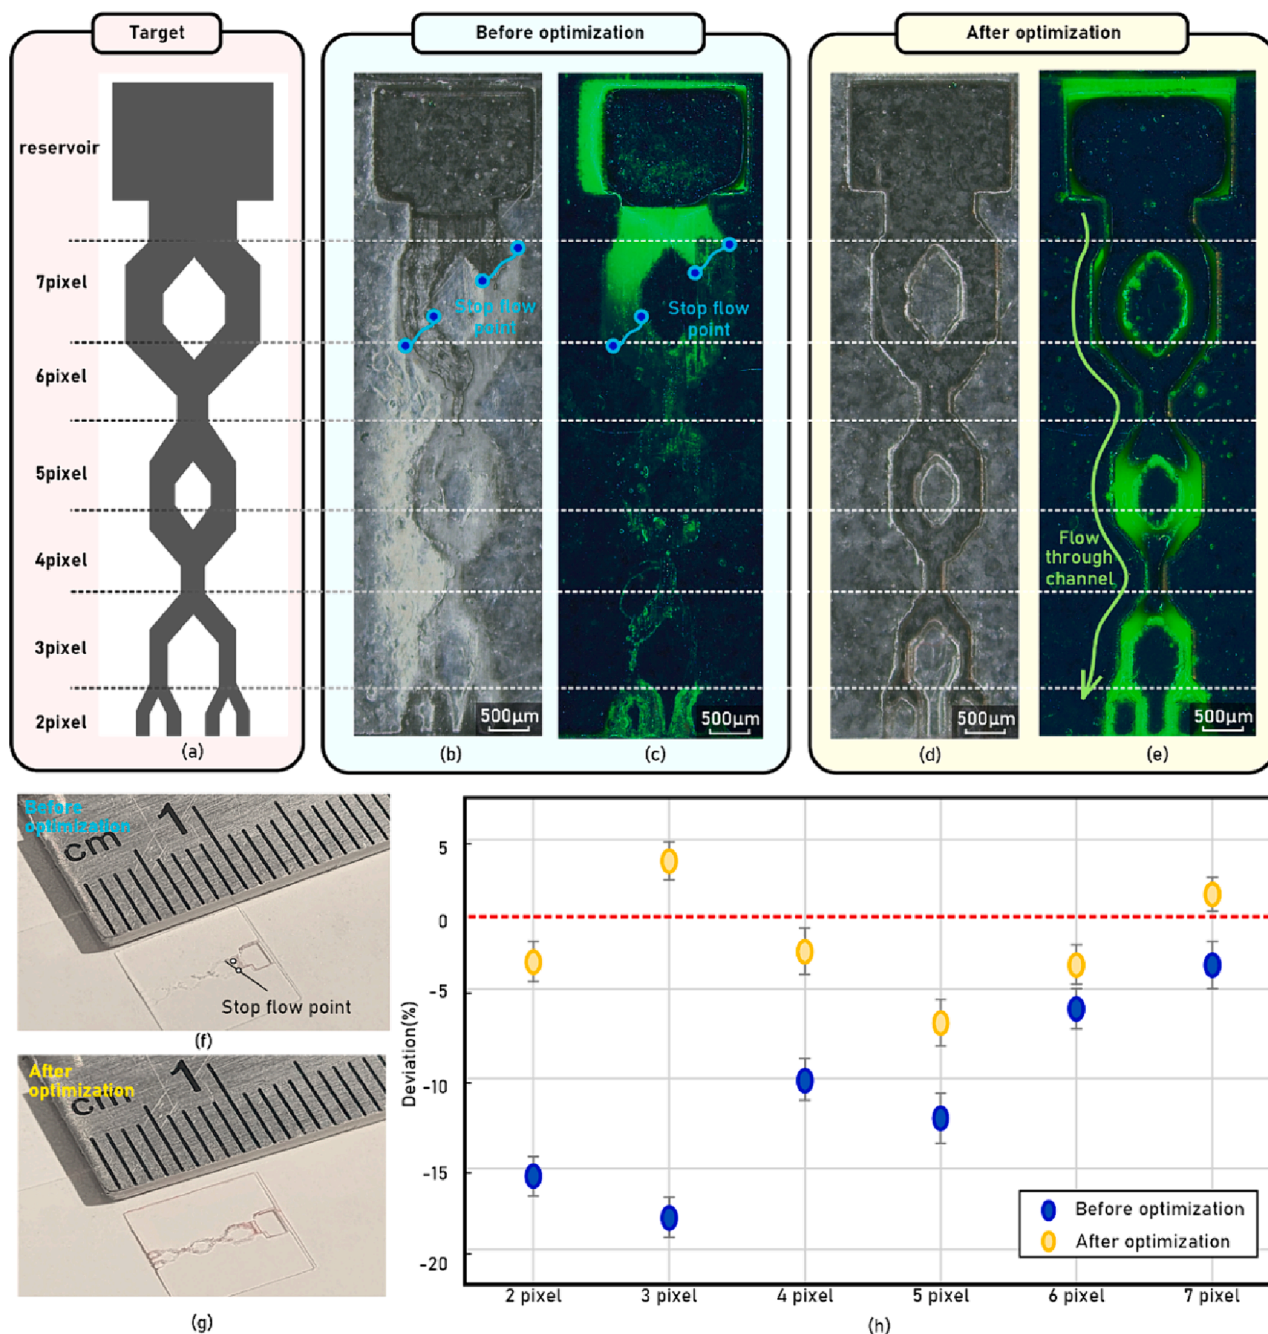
Printing assessment through fabricating microfluidic channels: (a) the design of channel pattern; (b) 3D printed channel before model optimization and (c) fluorescent ink injected showed blockage of channel in the printed structure; (d) 3D printed channel after model optimization and (e) fluorescent ink was injected showing the channels were succeed; (f), (g) Appearance of the device before and after optimization; (h) the deviation of the 3D printed channel width from the theoretical width.
